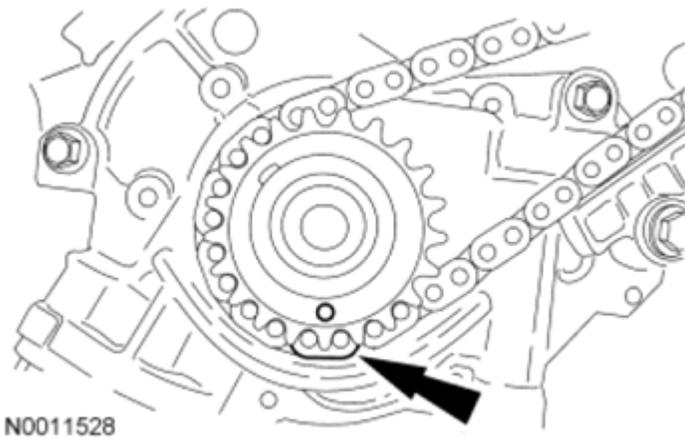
Aligning Crankshaft Sprocket Timing Mark And Timing Chain Link
